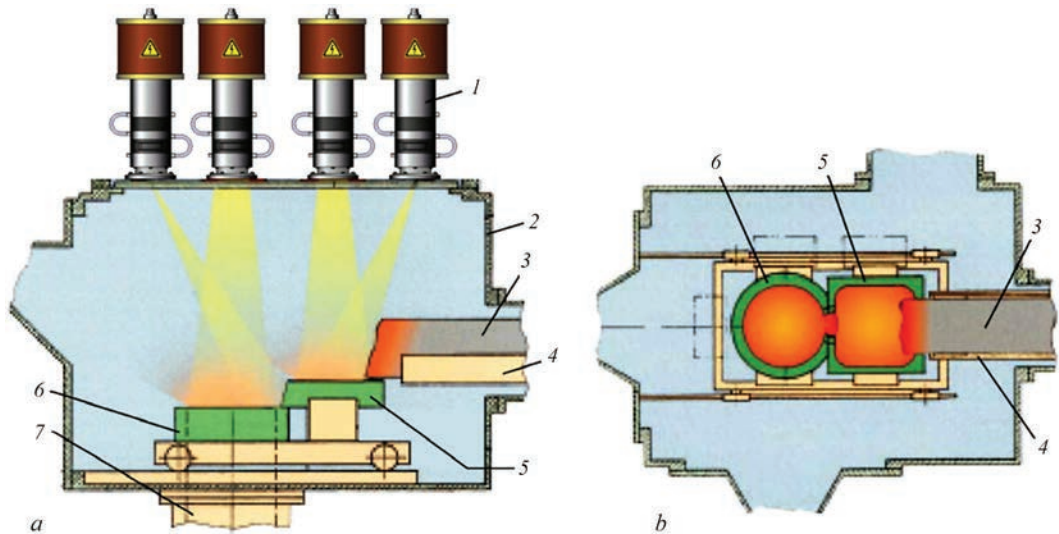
L-4 unit process chamber: *a* — front view; *b* — top view; 1 — electron beam gun; 2 — working chamber; 3 — remelted material; 4 — pullout tray; 5 — intermediate crucible; 6 — mould; 7 — ingot drawing mechanism
